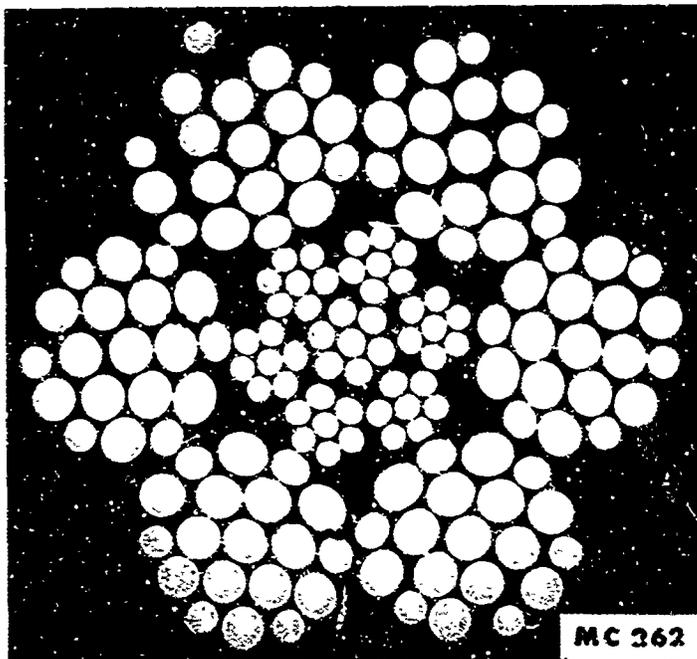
304 stainless steel wire rope after 34-months continuous immersion as part of a Nomad buoy mooring system, showing corrosion at periphery of some wires under a cable clamp near the bottom of the wire rope (clamp and wire rope shielded with tape) (5 magnification).
